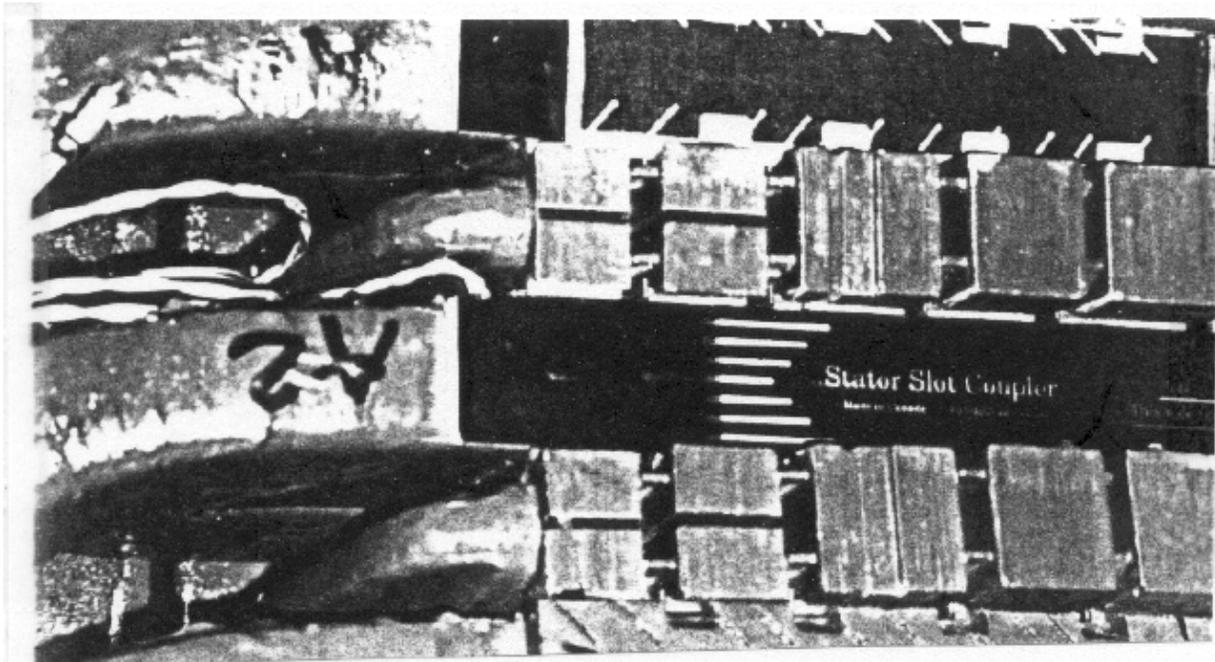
Photograph of an SSC being installed under the wedge in a large turbine generator.
